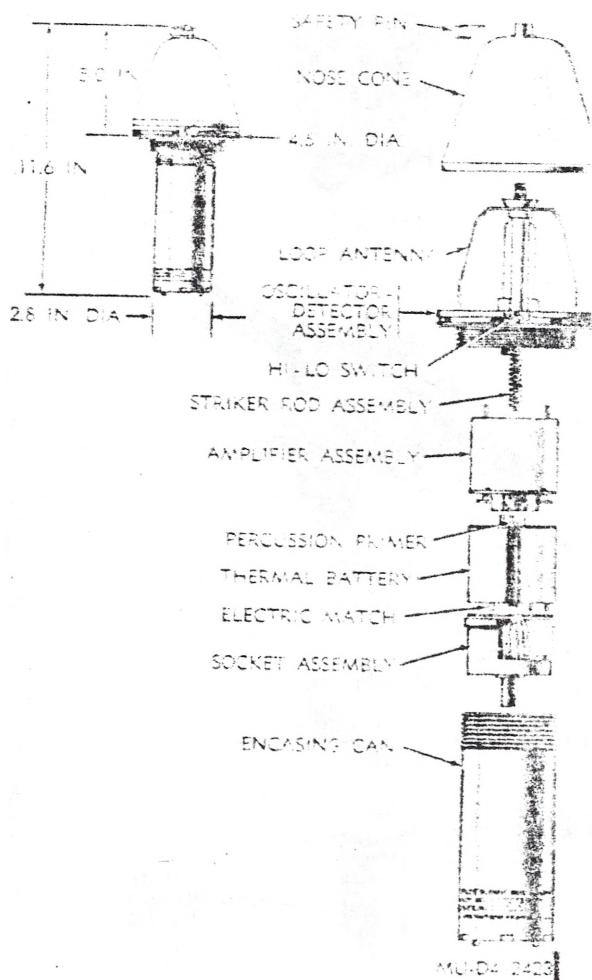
Exploded View of VT Bomb Nose Fuze (Bar and Ring Types)
